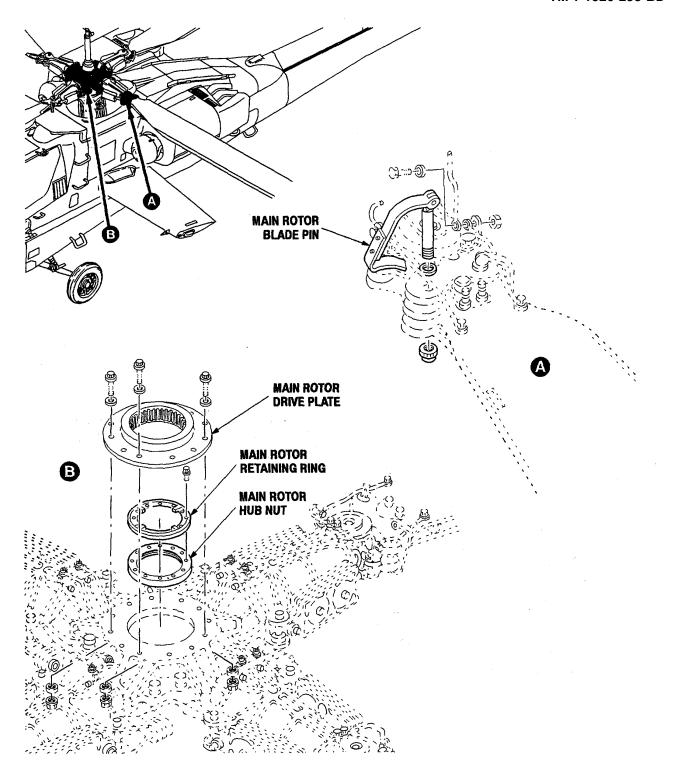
Main Rotor Subsystem Component Location (Sheet 2 of 6)
